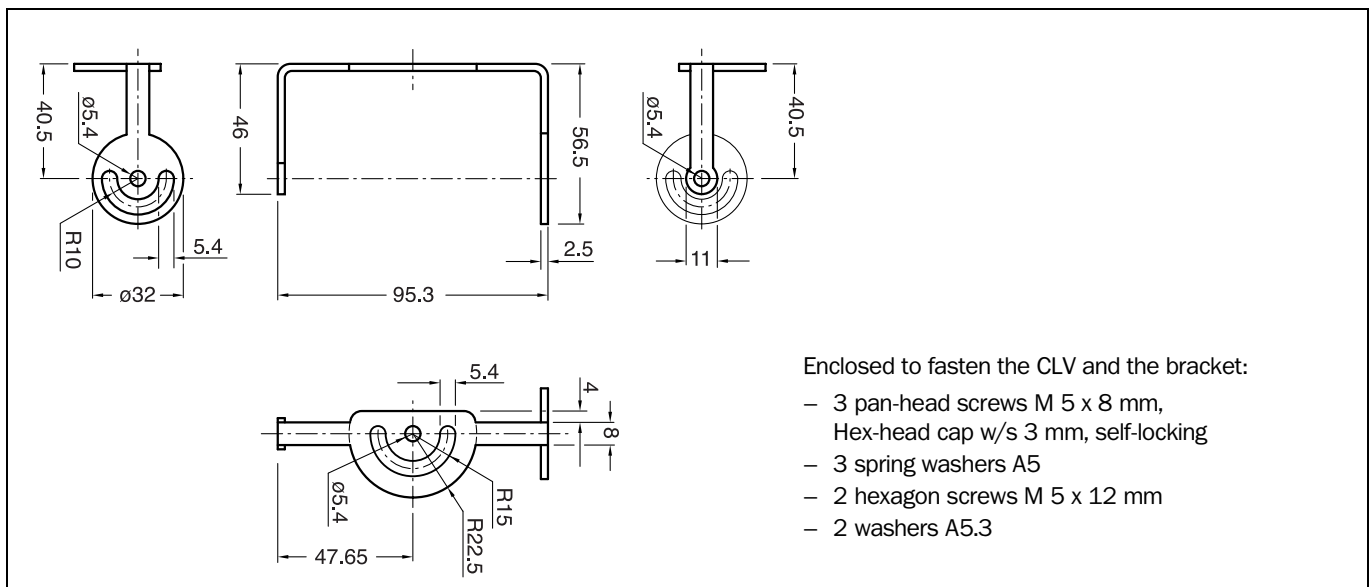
Dimensions of the mounting bracket No. 2 022 564
